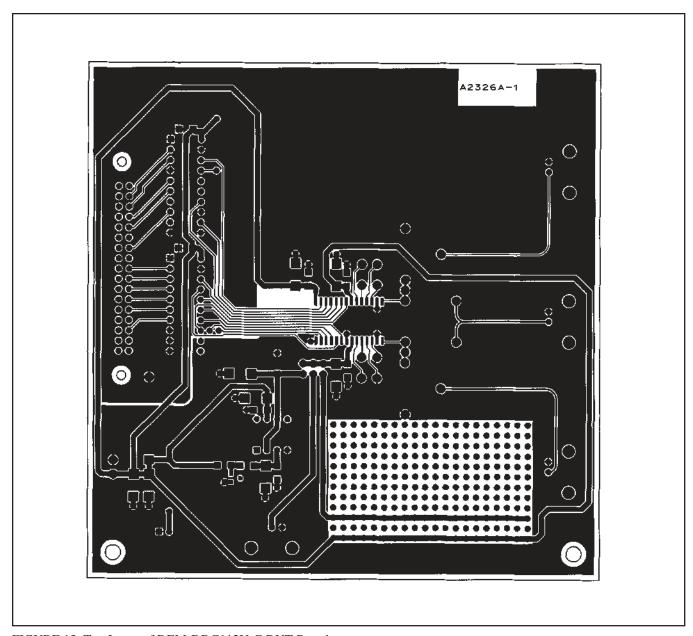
Top Layer of DEM-DDC112U-C DUT Board.
